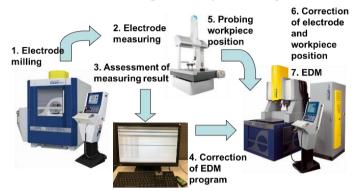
CNC Machines With Automatized Magazine for Tools and Workpieces and Quality Control System
